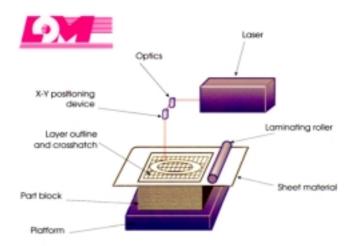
the LOM process (courtesy Helisys, Inc., Torrance California, USA).
